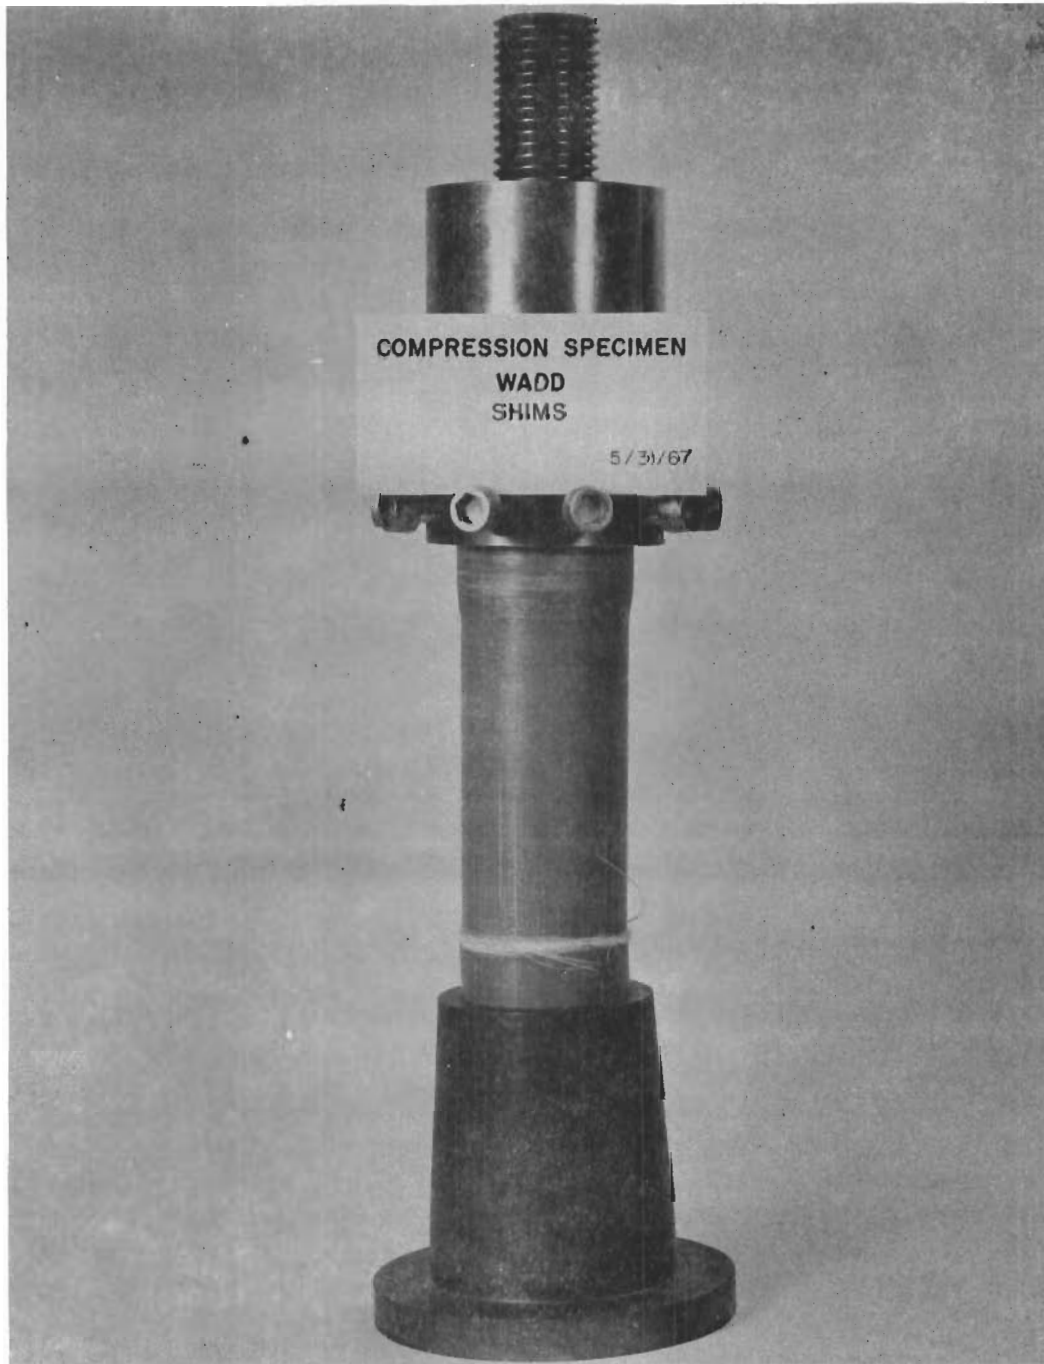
Tubular Shim Joint Specimen-After Compression Test
